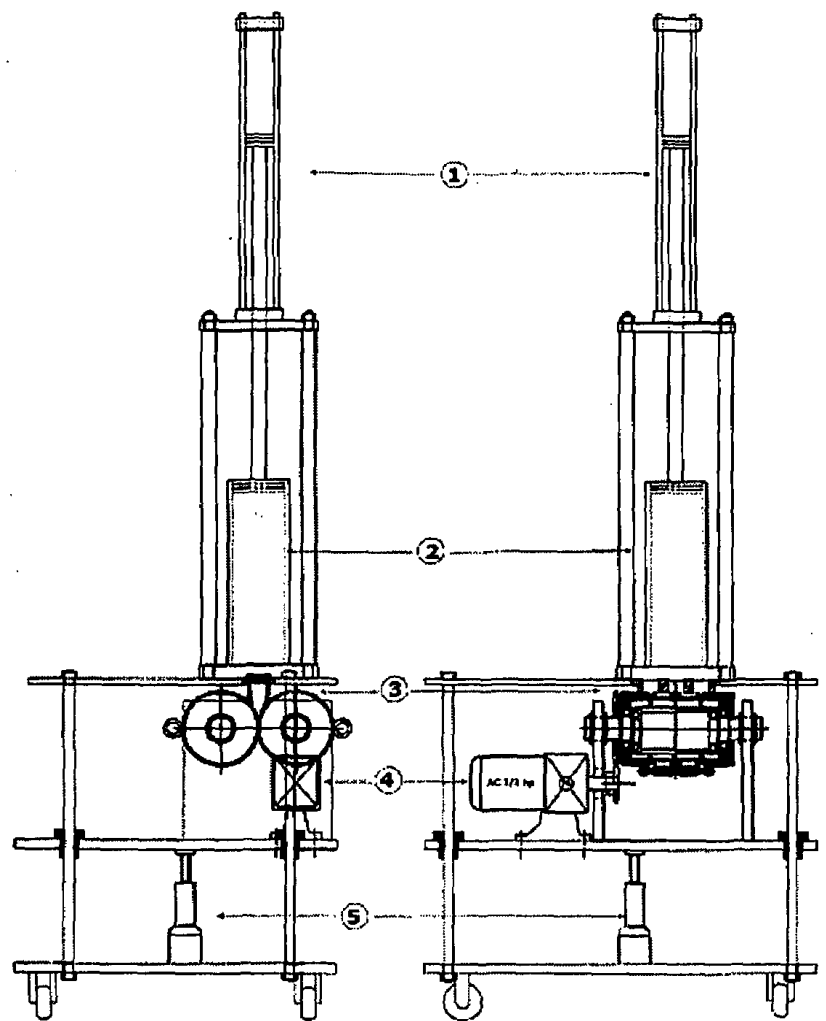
A view of the fifth experimental rice seed pelleting machine
